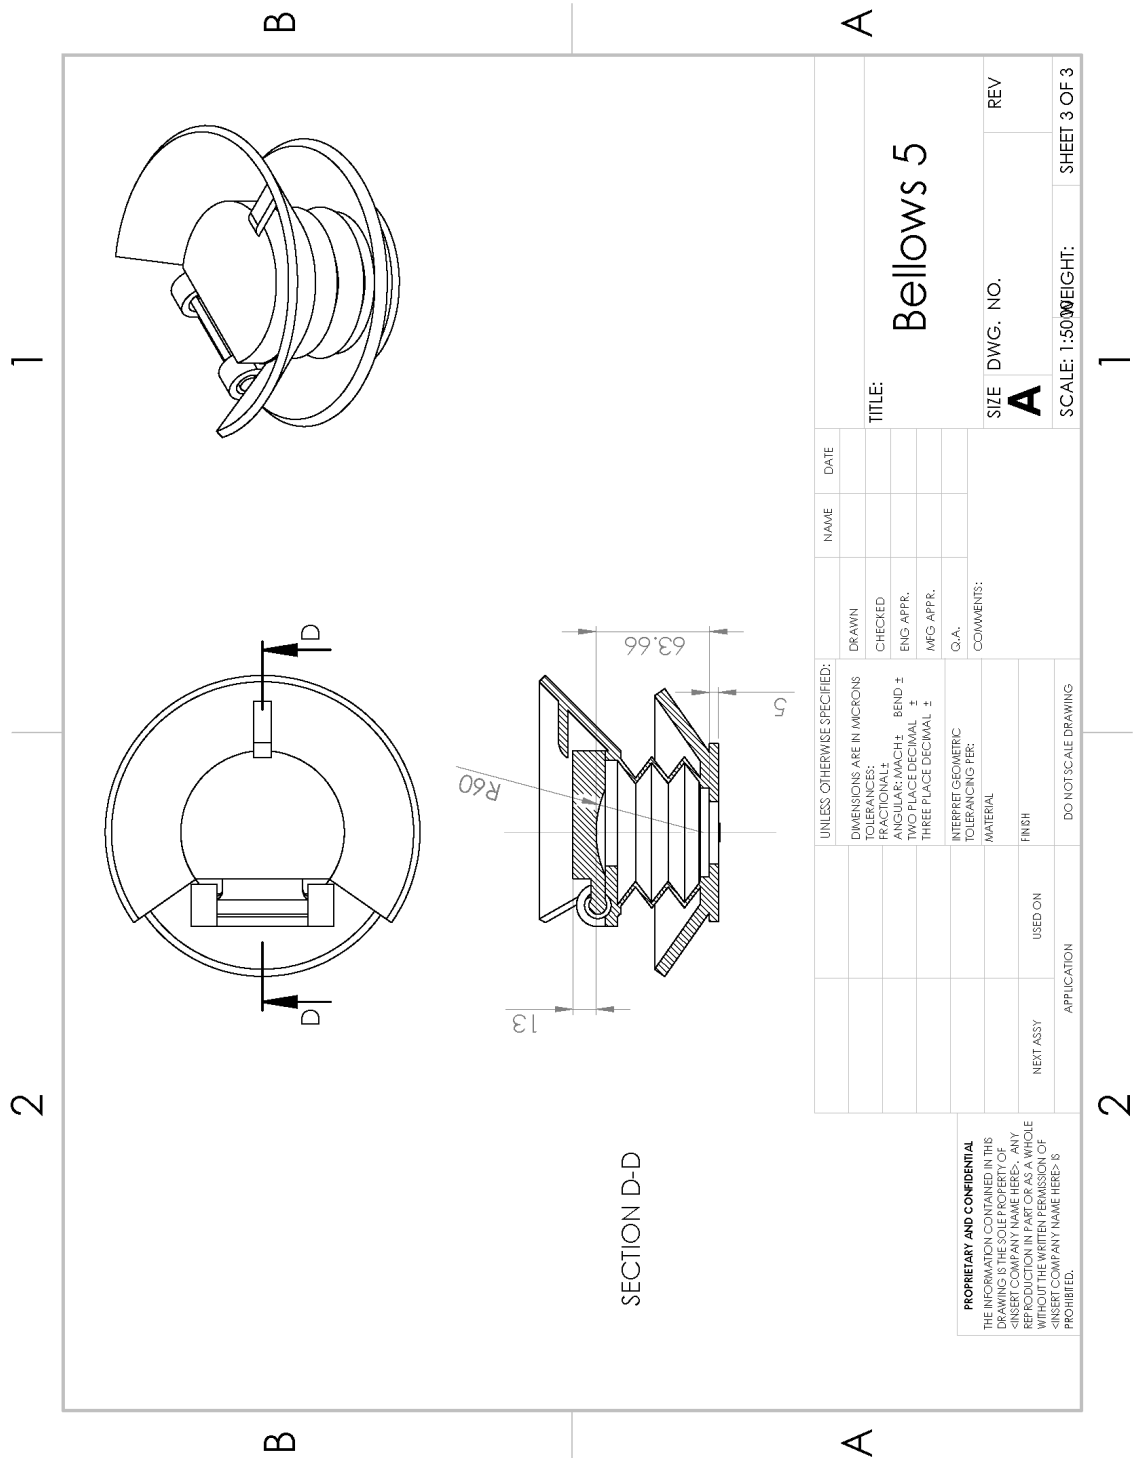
Technical drawing of the spring-body pressure sensor, page 3.
